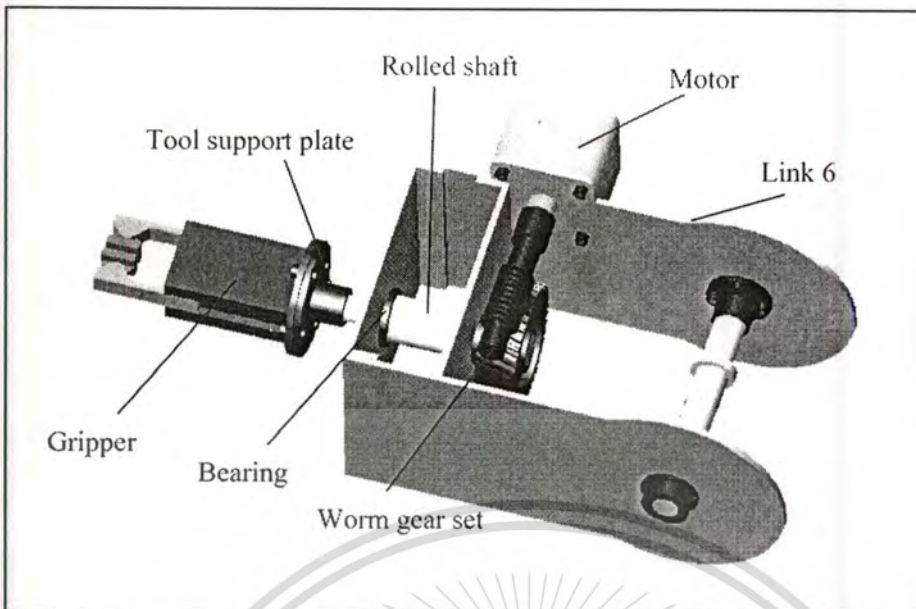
Assembly parts of rolled-joint on the hand (joint 6)
